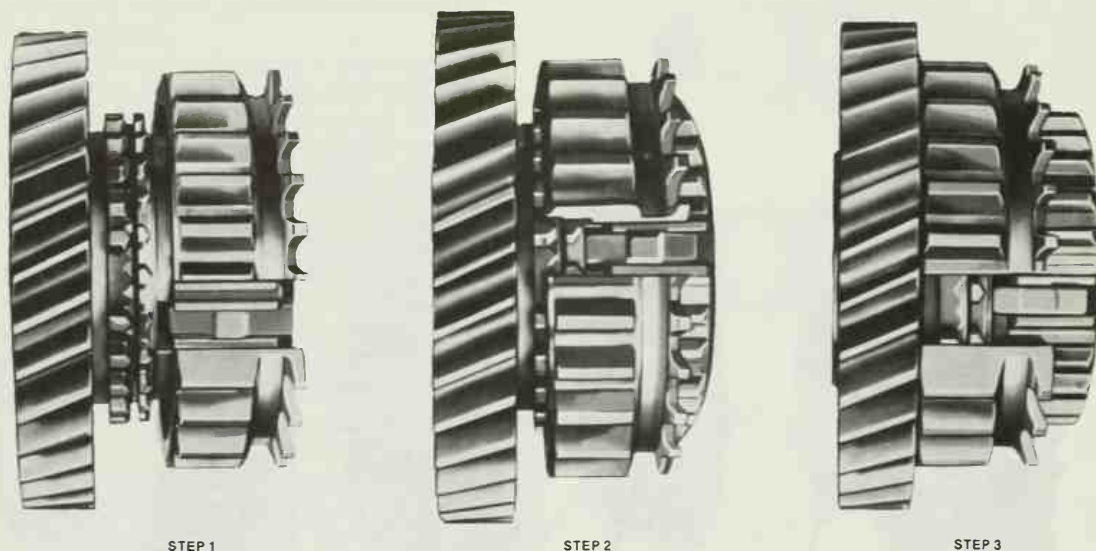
Engagement of the synchronizer. (Chevrolet Motor Division of General Motors Corporation)
